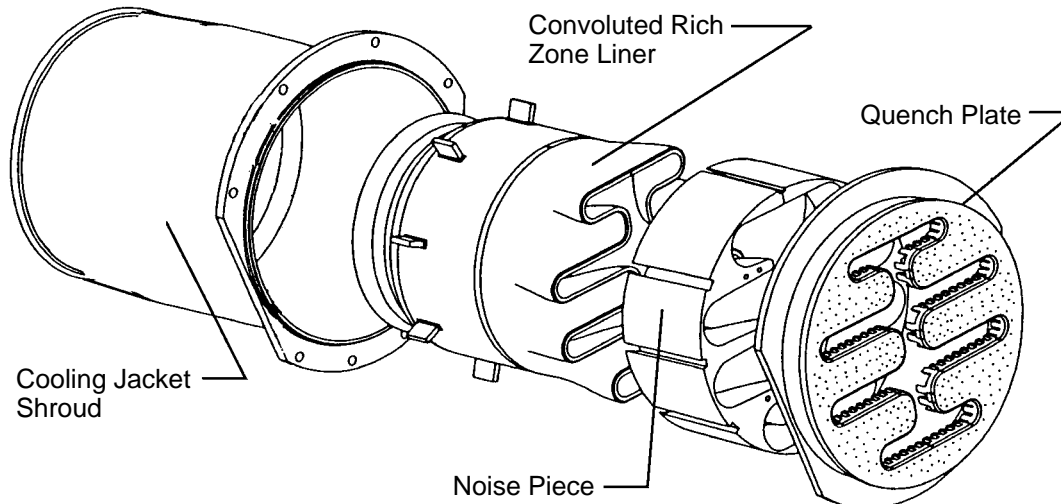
Exploded View of Rich-Quench Module Assembly (Bulkhead Subassembly Not Shown)
